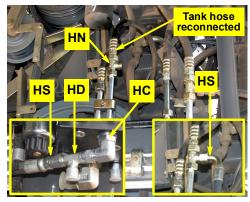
with insets: Run-tee at tank port, machine's tank hose reconnected, tank hose installed
